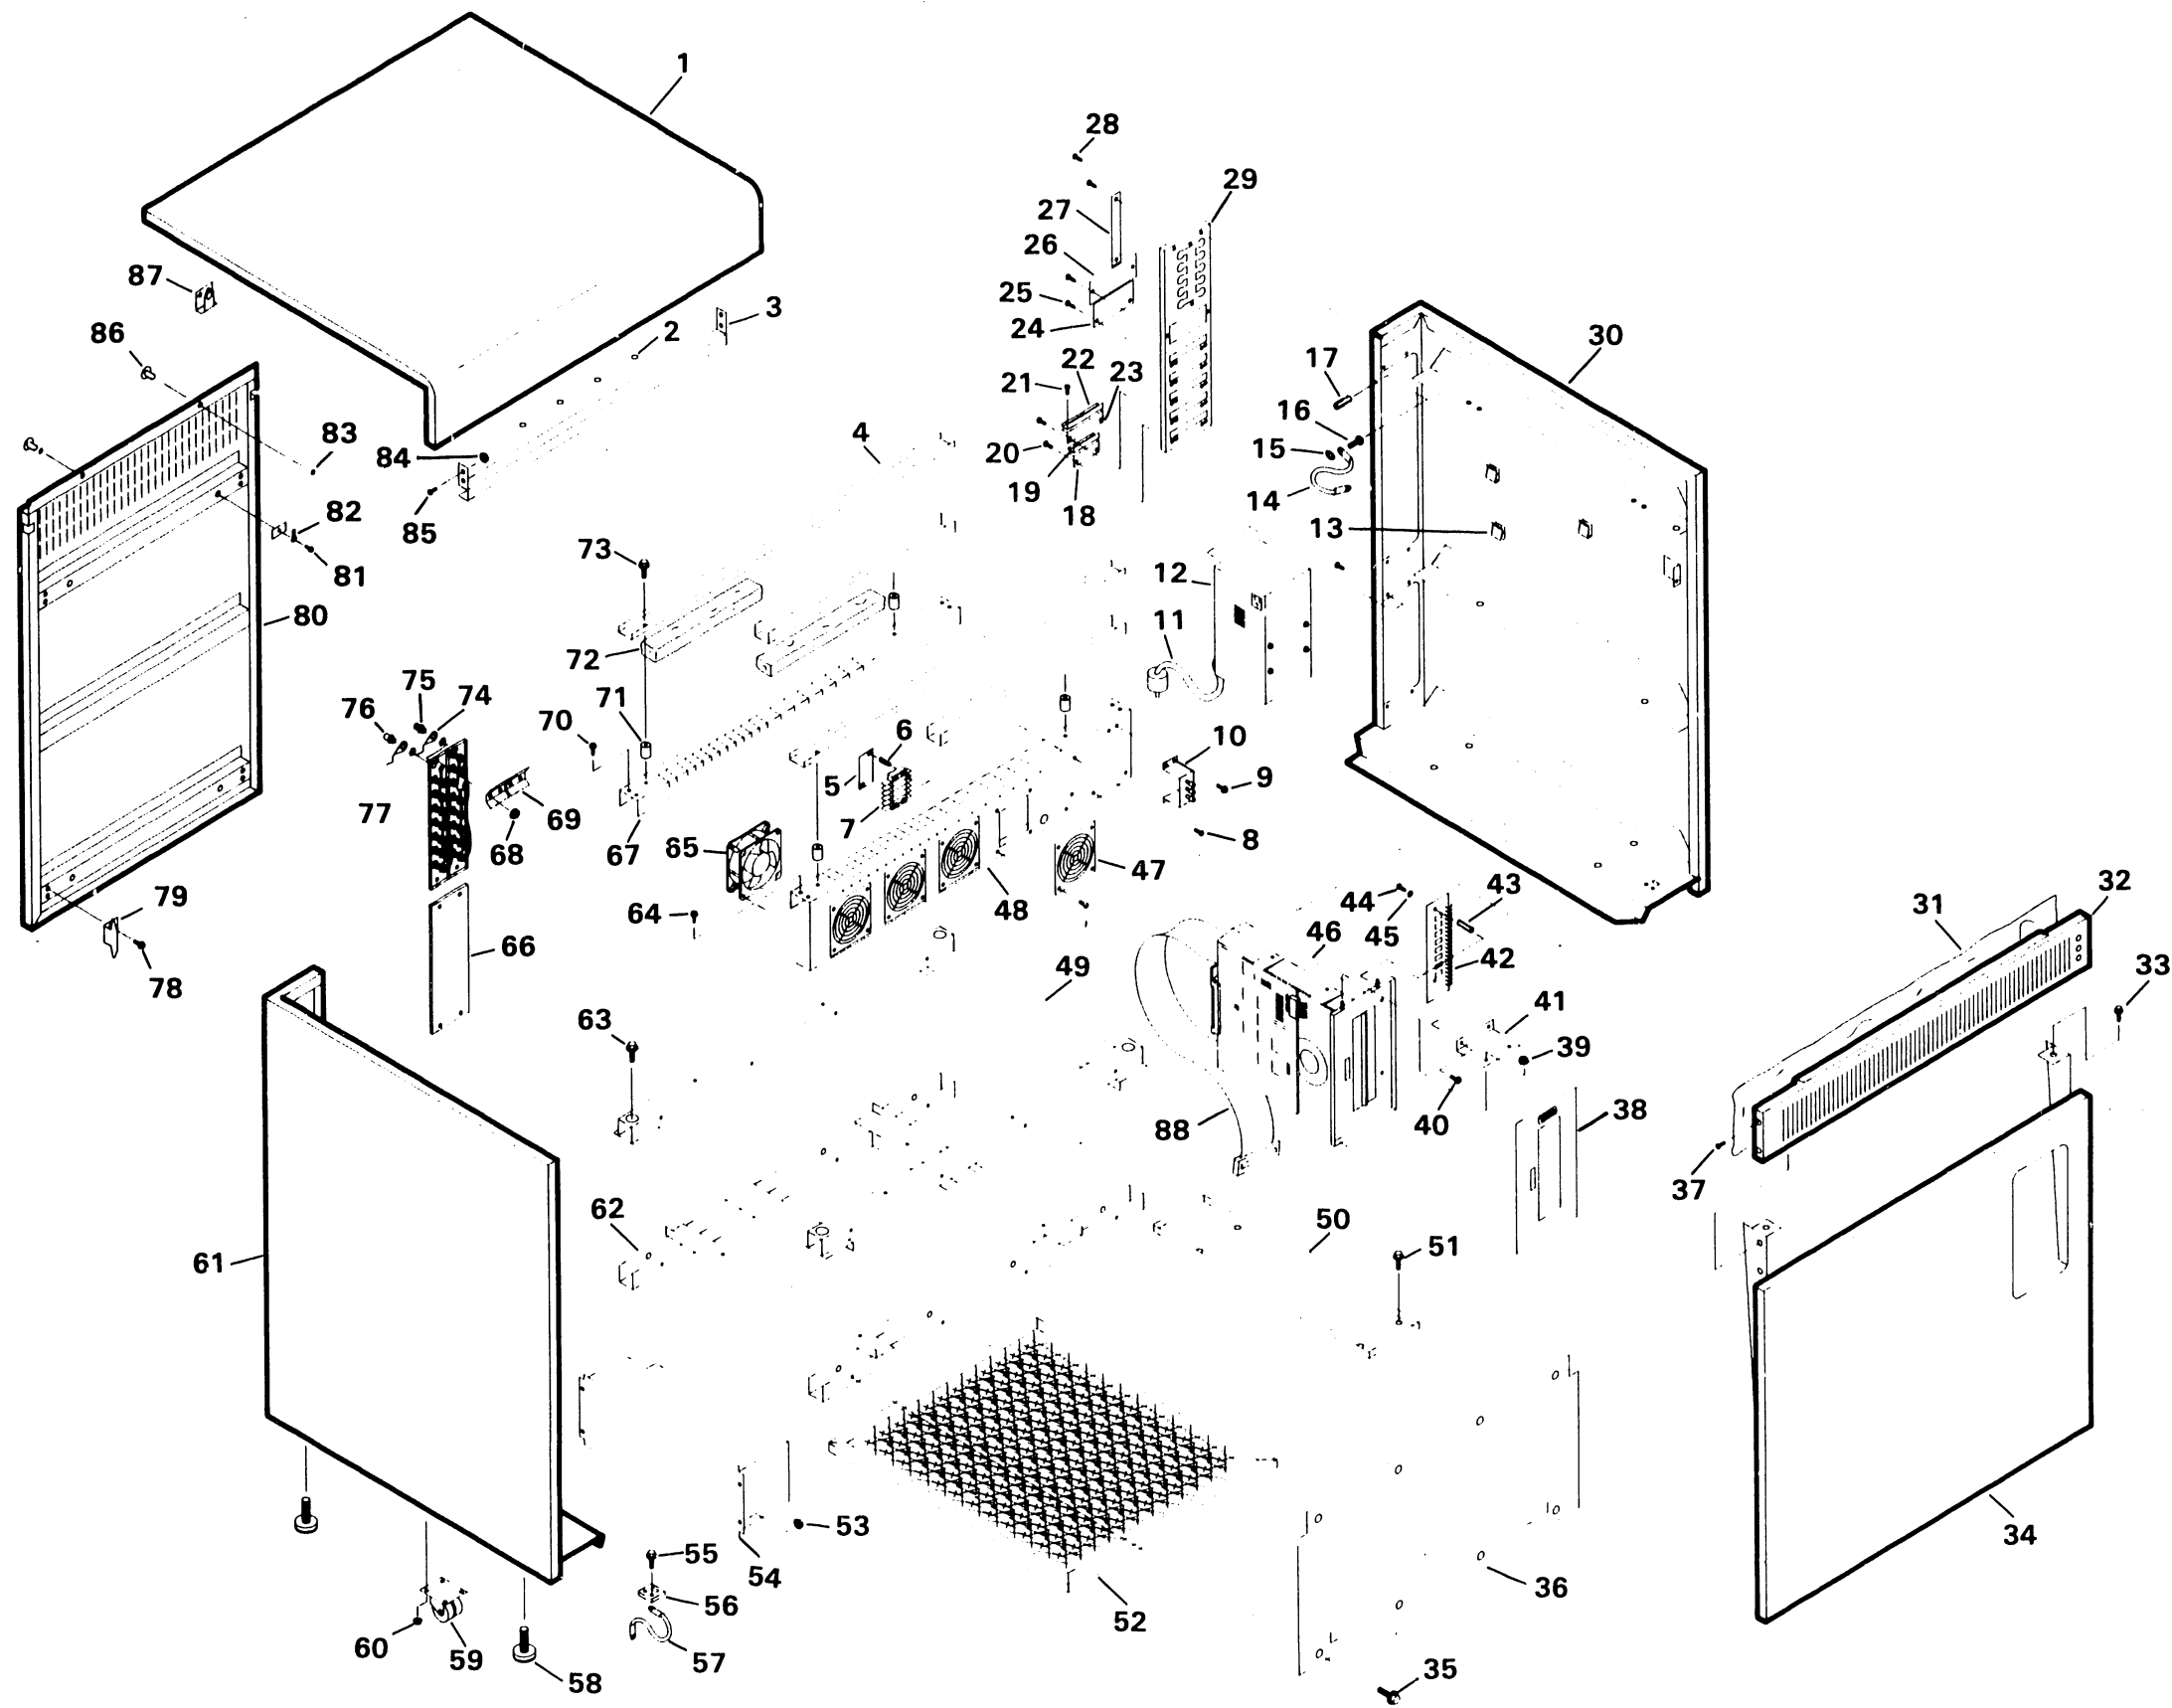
CABINET ASSEMBLY (ASSEMBLY PART NO. 279-4101)
